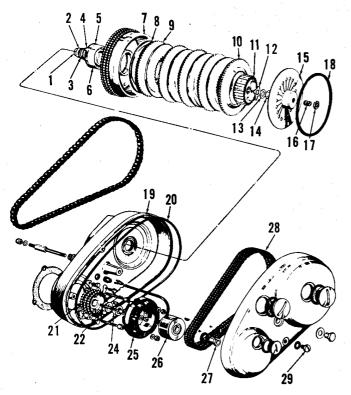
Exploded view of clutch and primary drive assembly used on later models. Refer also to Fig. N2-6 or N2-7 for view of early model clutch. Install shims (3 & 4) as required for primary chain alignment.
